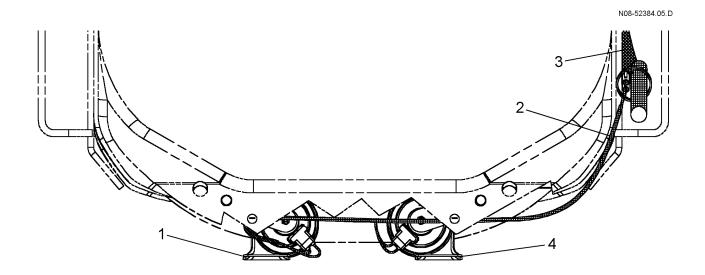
Electric Horn FWD Chassis Wiring Crossmember
